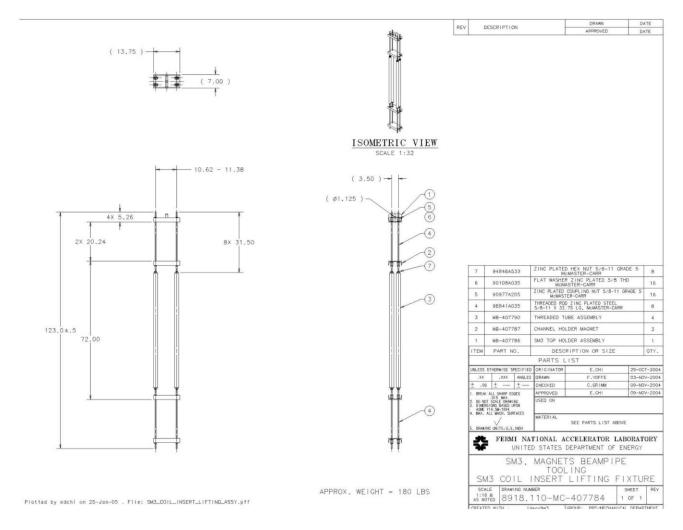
The detail eng. drawing of the coil insert lifting fixture.
